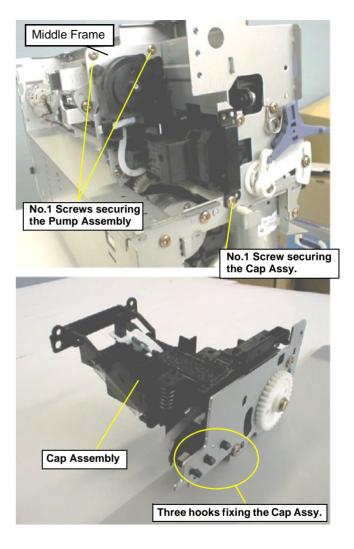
Removing the Pump Assembly & Cap Assembly
